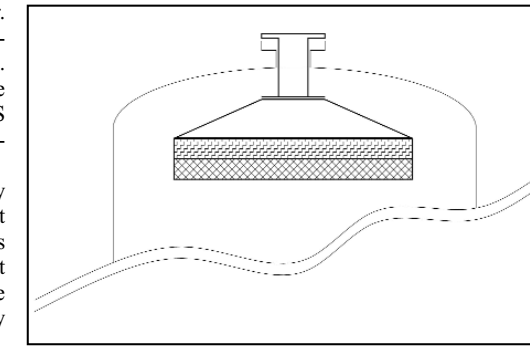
Weld-less introduction of housing and mist eliminator into vertical vessel, supported with flanged spool piece.
